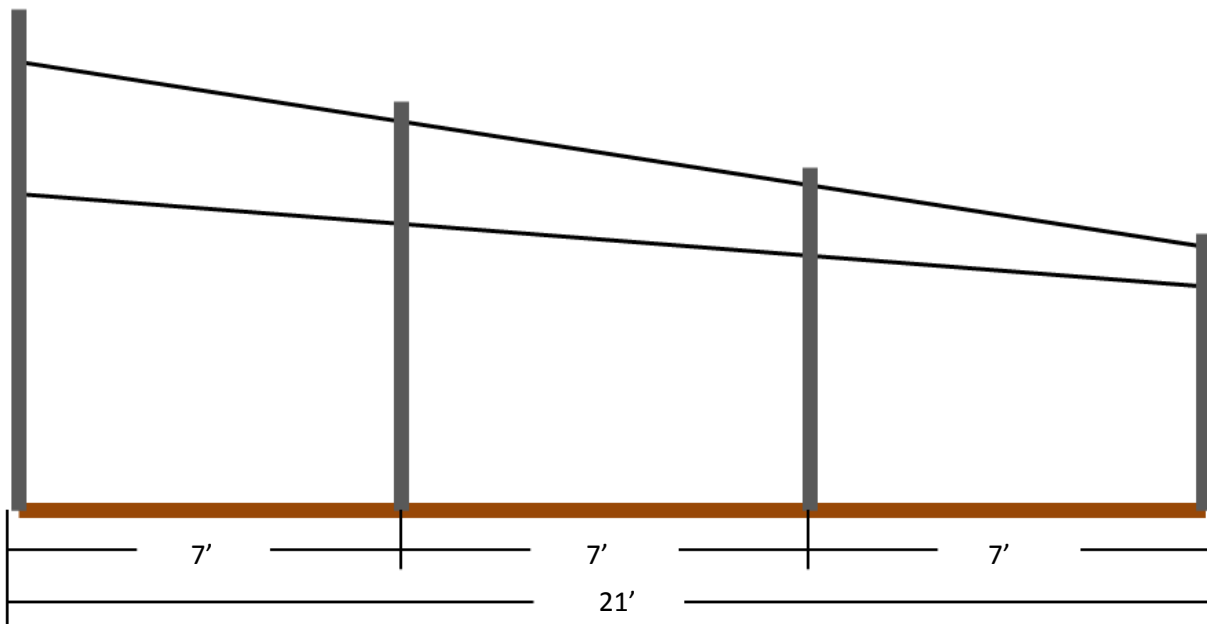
The full scale fixture may require addition supports along each arm to minimize bending. While the two end supports could be used similar to the 1/3rd scale fixture, the additional supports prevent sagging during construction.
